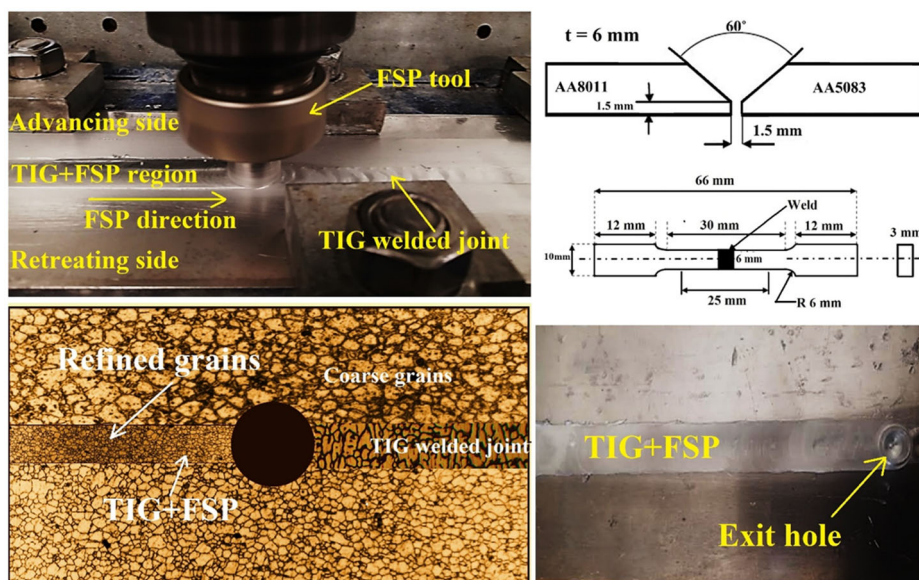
Experimental representation of TIG and TIG + FSP welded joints.
